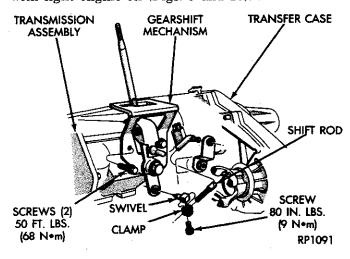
Gearshift Mechanism Lubrication (NP241 Transfer Case)
